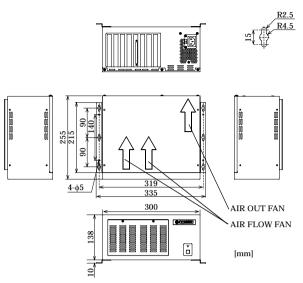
Outside Dimensions < ECH(PCI)BE-H7A, Horizontally placed >
